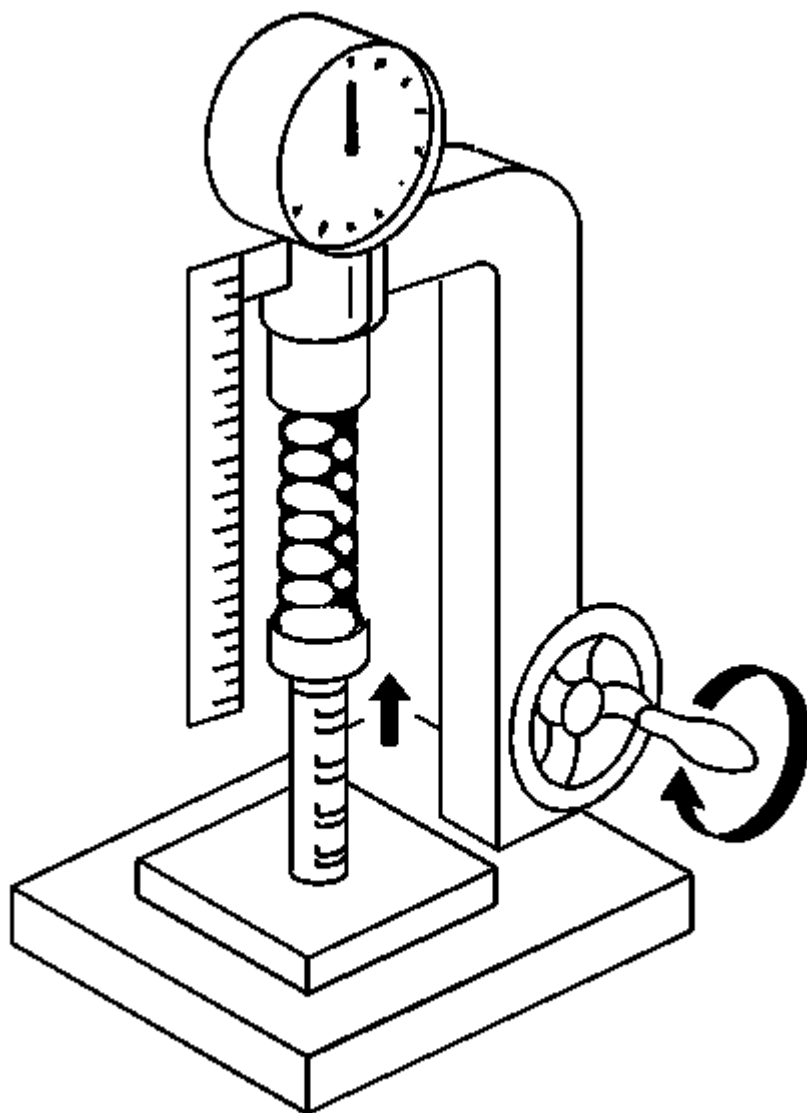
Measuring Tension Of Valve Spring At Specified Installed Height
